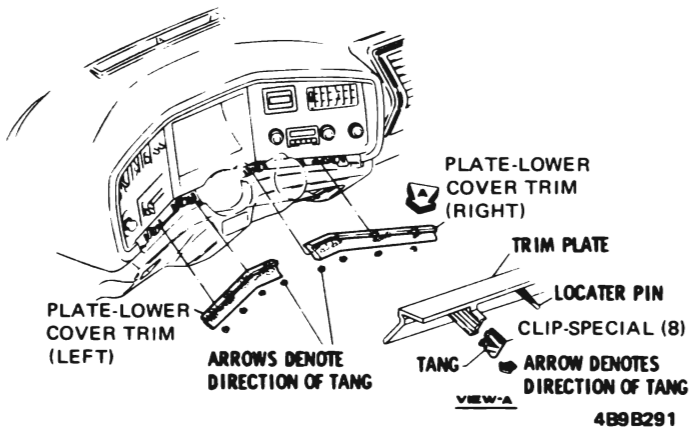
B-233 Instrument Panel Lower Cover Trim Plates
